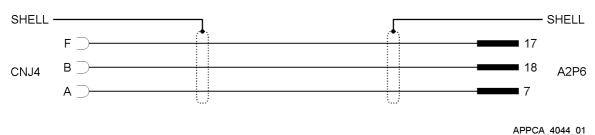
P/N 443-50062 W402 Wiring Diagram
